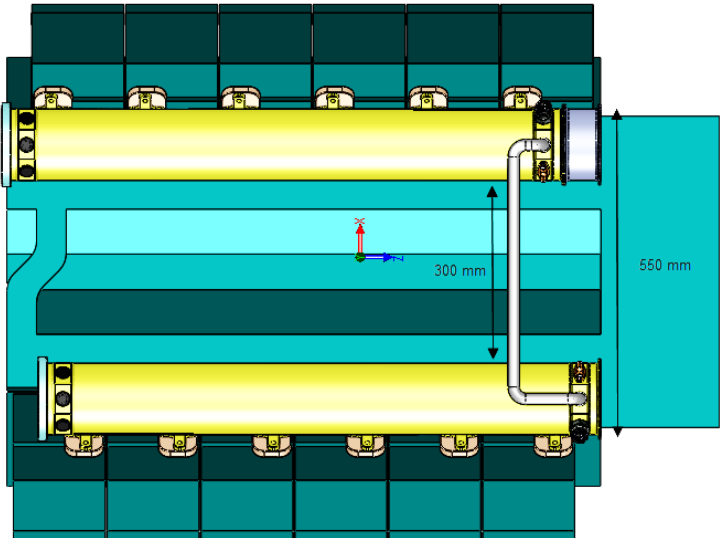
Rough dimension drawing for Budget Viper concept, top view
